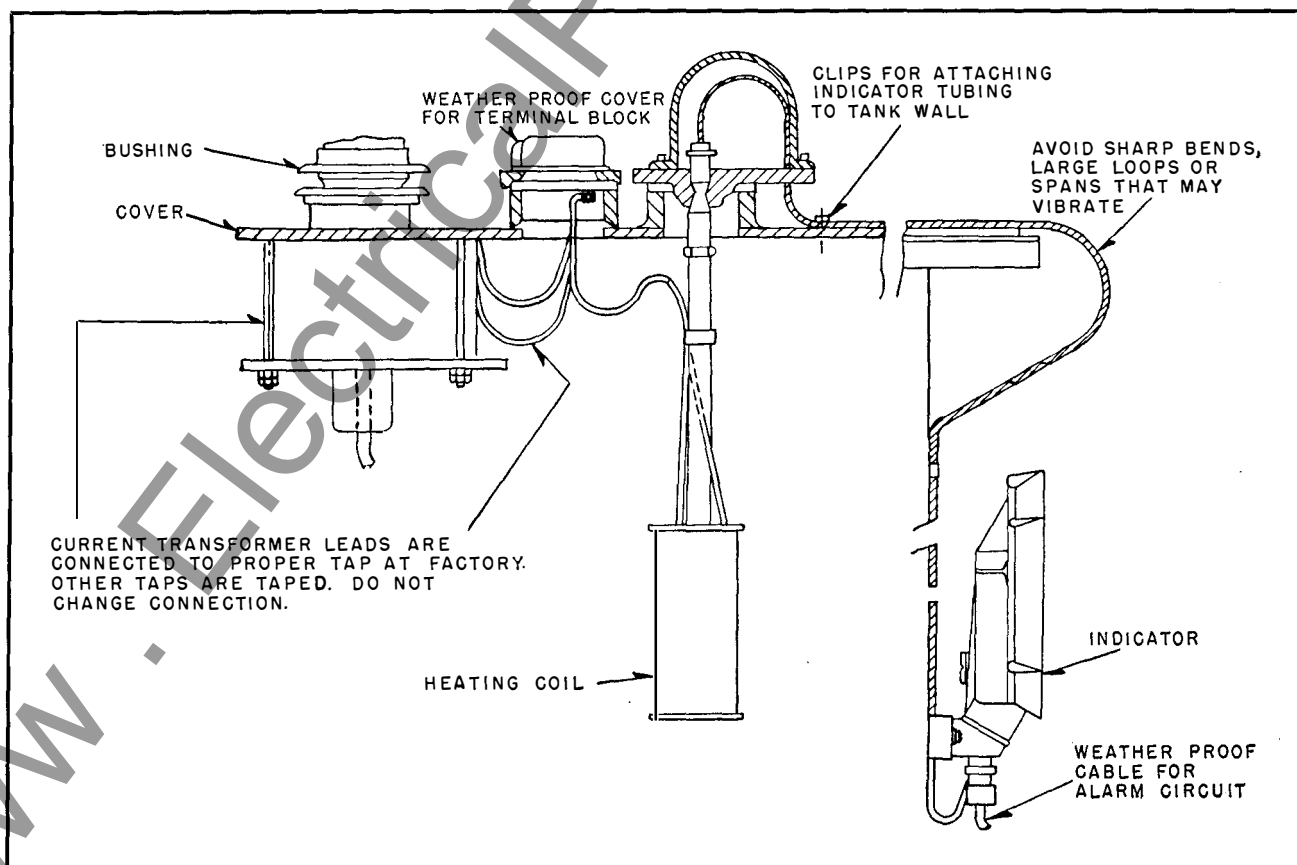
Outline Drawing Showing Assembly of Temperature Indicator.
